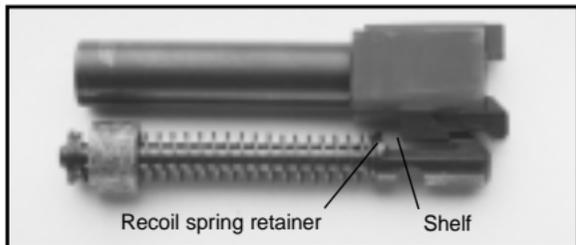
A (relationship of recoil spring assembly to barrel locking block inside of slide)
